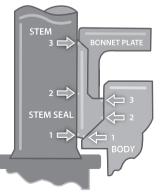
Patented Stem Seal incorporates 3 zones of contact between the stem and the seal.
